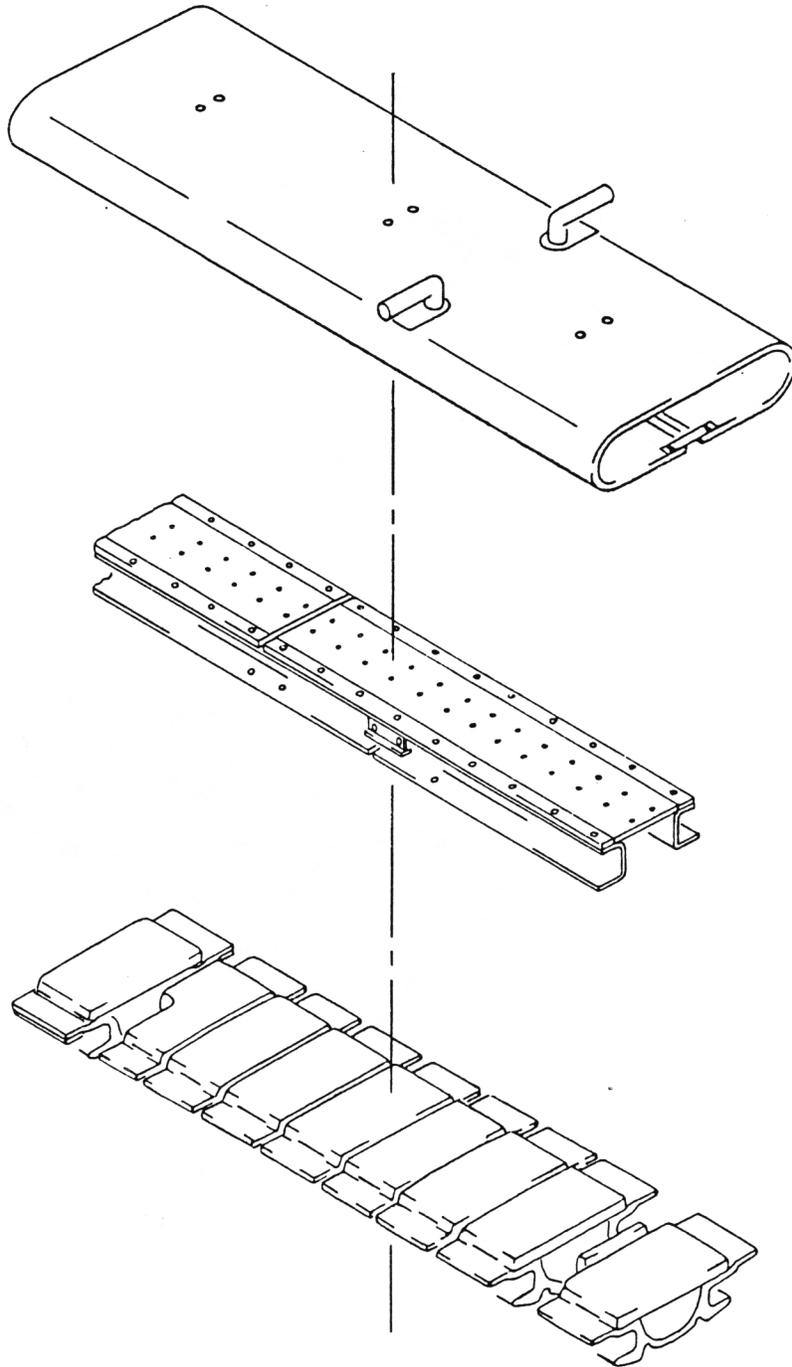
BOEING 757 OVERHEAD CEILING OUTLET
